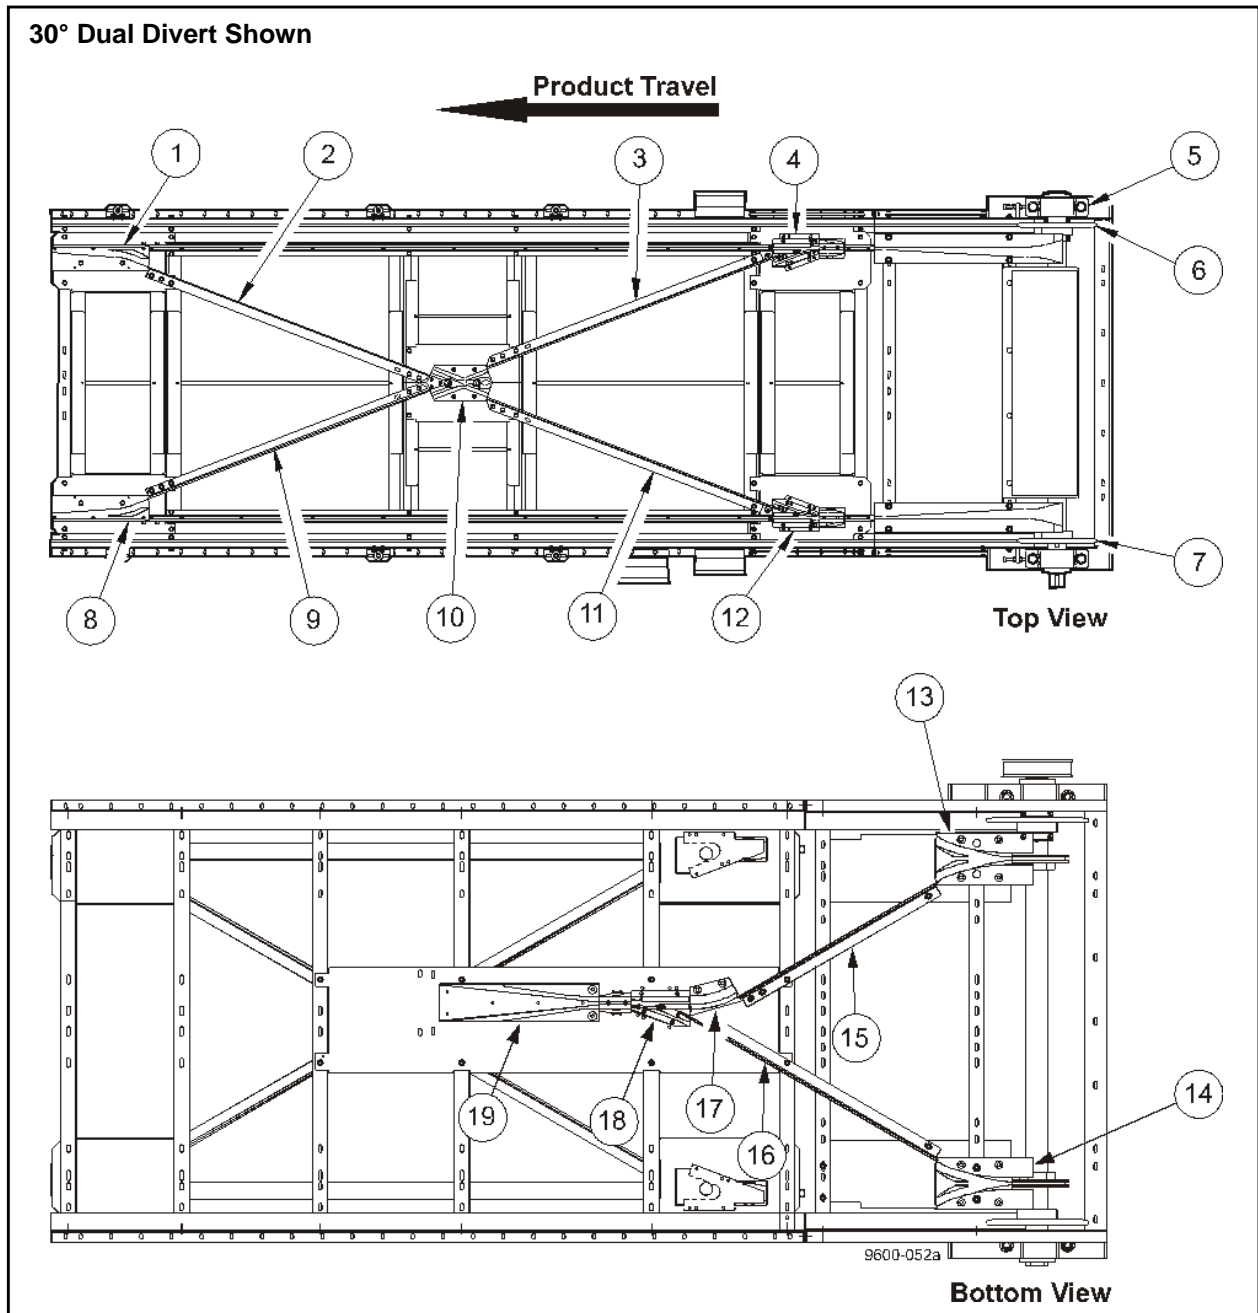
7 Idler/Intermediate Section - 20° and 30° Dual Divert - Drawing
